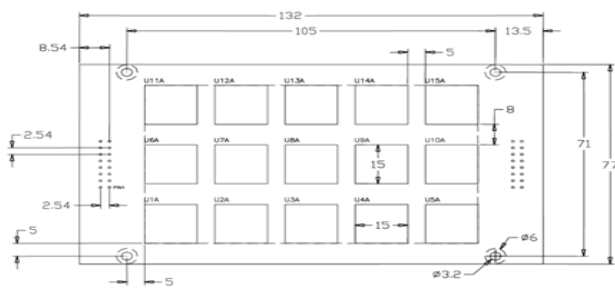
Schematic diagram of pcb board, flip chips and solder balls packaging
